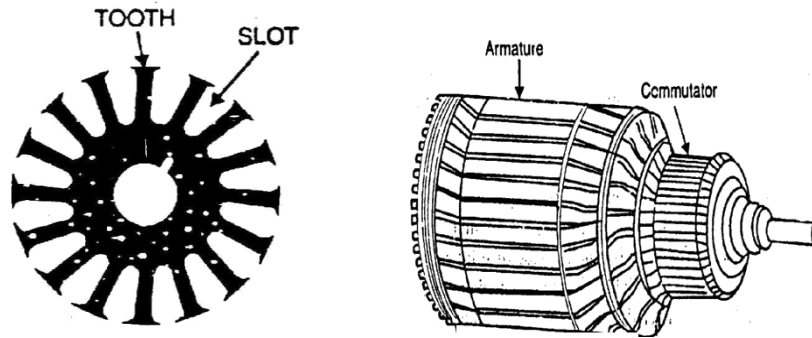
Front View of rotor lamination and final rotor cylindrical structure
